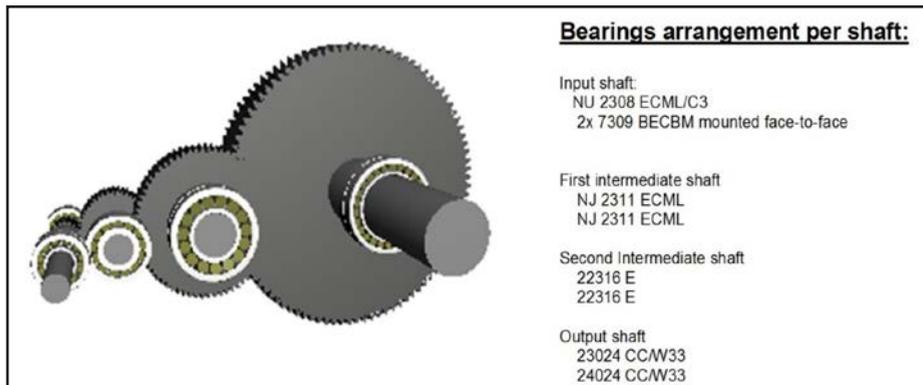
Schematic of a three stages helical gear unit and bearing arrangements.
